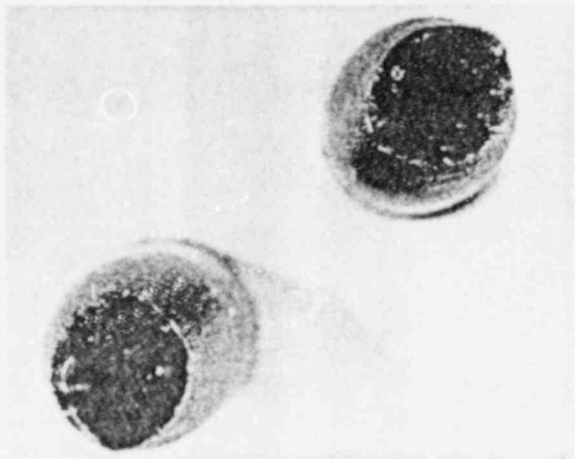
Fracture Location, Necking Behavior, and Fracture Appearance for Irradiated HAZ Tensile Specimens
